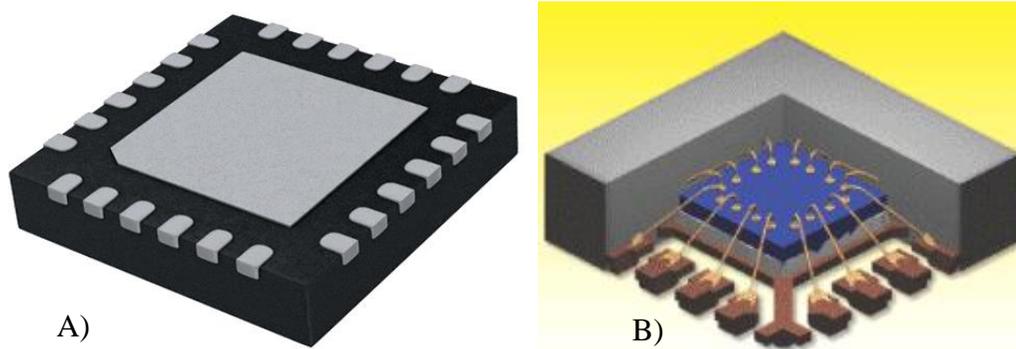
A) BOTTOM VIEW OF QFN PACKAGE B) INTERNAL VIEW OF WIRE-BONDING DETAILS
